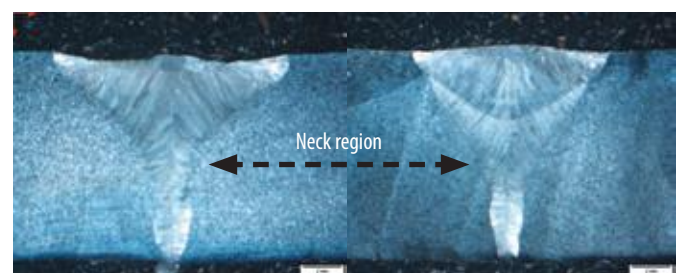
Macrographs of Single and Double Pass Laser hybrid welds indicating neck region
